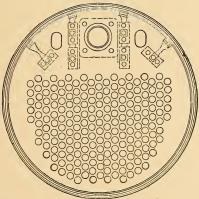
Cross Section, Pennsylvania R. R. Boiler, Class "O." Q. What is the disadvantage of excessive united cross section of tubes?
